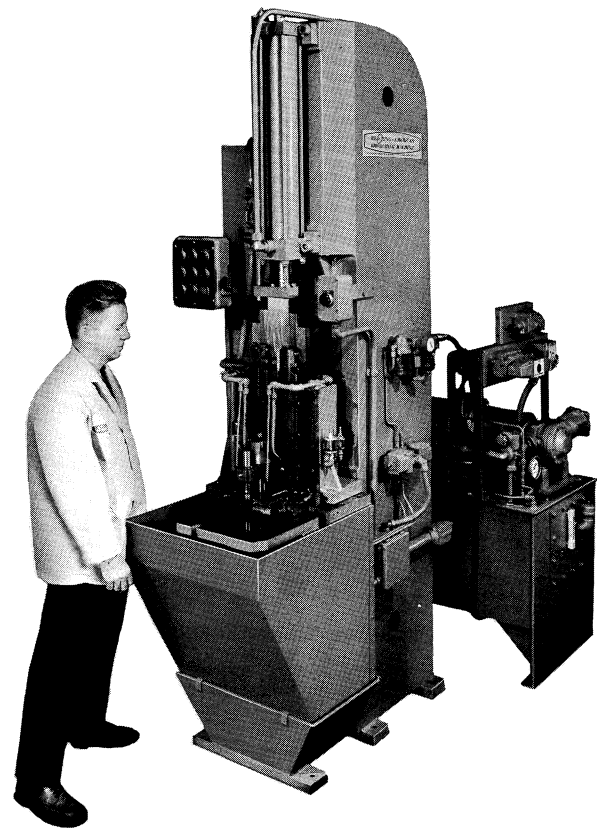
C Vertical hydraulic press has a four-station fixture for surface broaching connecting rods and caps.
